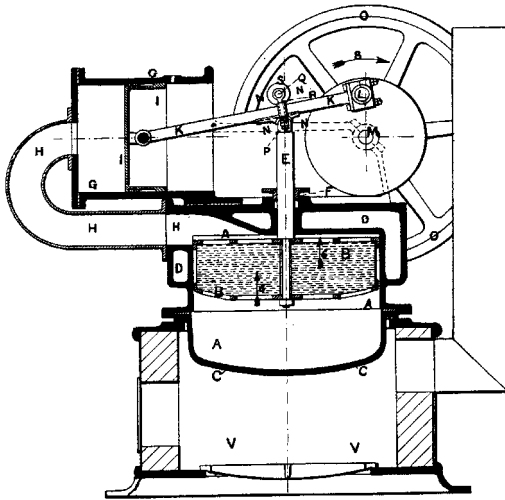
Cross-section through an improved model of a Robinson engine which was fitted with regenerator and a roller drive for the displacer. After Kennedy (1904–5)
